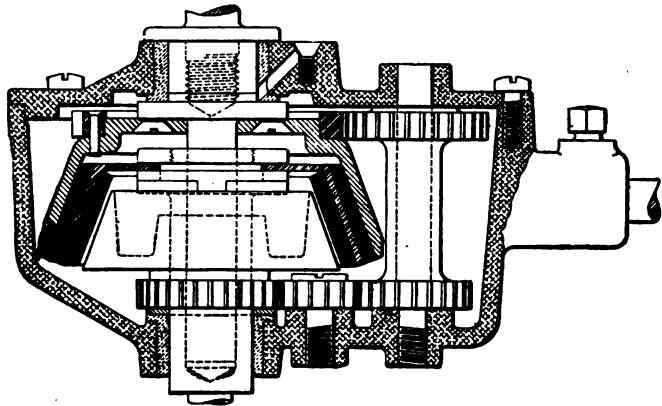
SECTIONAL VIEW OF ETTCO TAPPING ATTACHMENT
